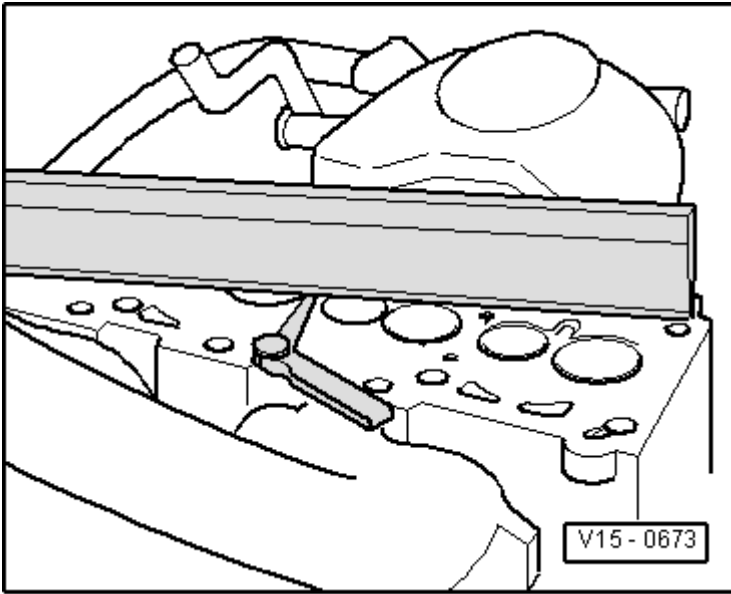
Identifying Check Of Cylinder Head For Distortion
